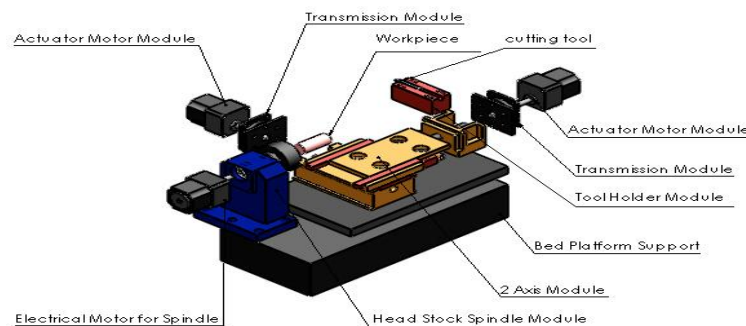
Exploded view of the CMSS-CNC Lathe machine system bases on the compiling unit
